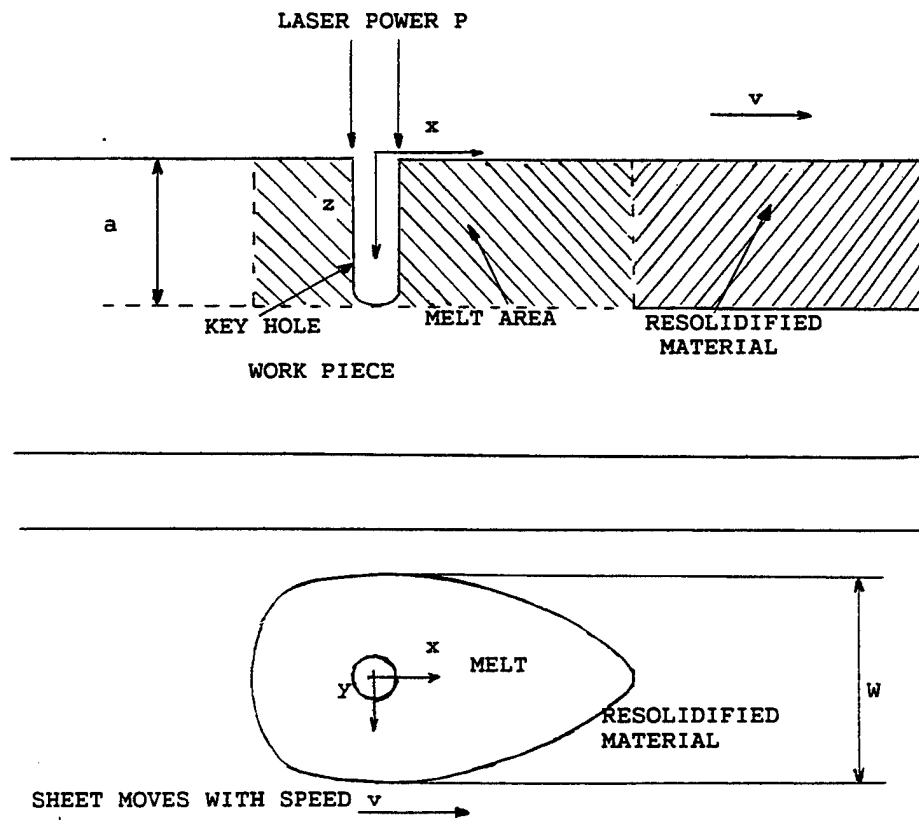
Geometry of Keyhole During Laser Penetration Welding.
